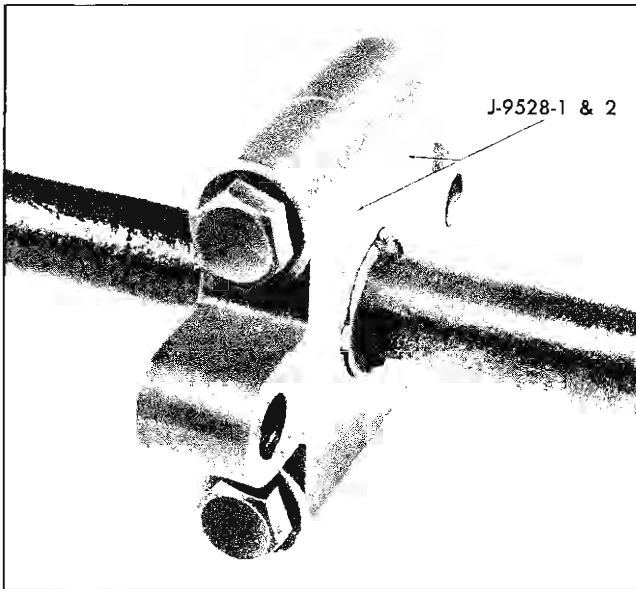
J-9528-1 & 2 Installed on Shaft
